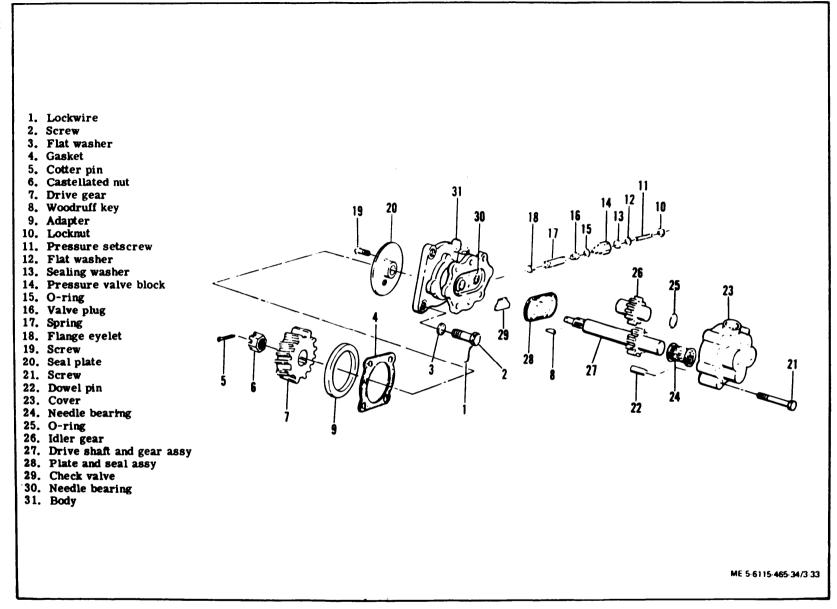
Hydraulic Pump Assembly, Exploded View
